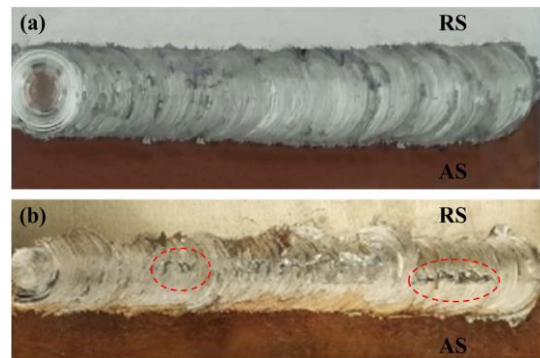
The appearance of the joint surface welded using: (a) squared pin, (b) triangular pin
